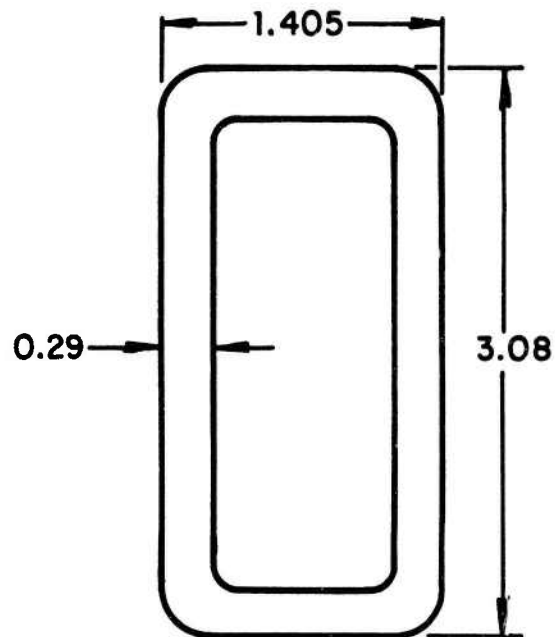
TENT FRAME MODEL FOOT DETAIL.
